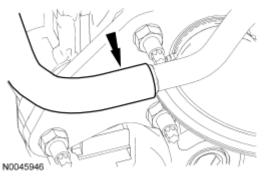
Locating Secondary AIR Injection (AIR) Hose Courtesy of FORD MOTOR CO.
